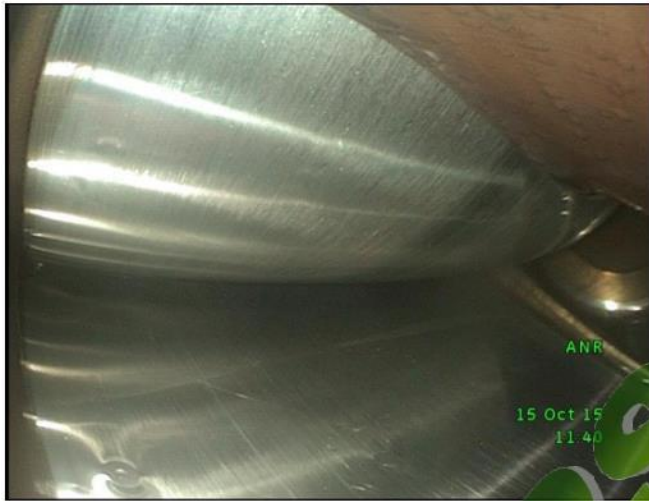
shows bearing position no. 1, the bearing of the planet carrier at rotor side. No irregularities.
